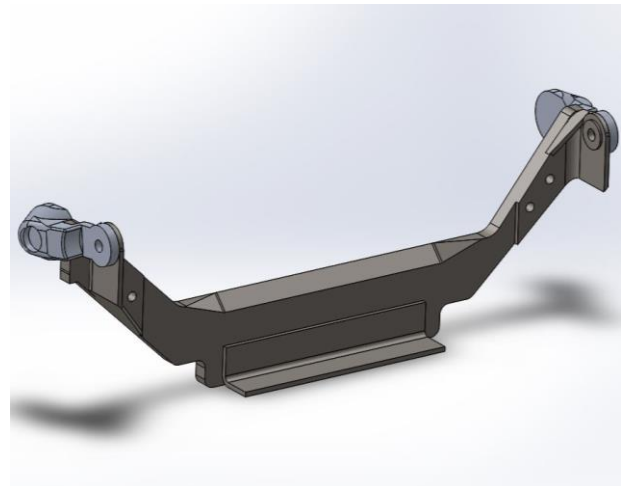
SolidWorks model of the chassis support bracket and the cast aluminum pieces.
